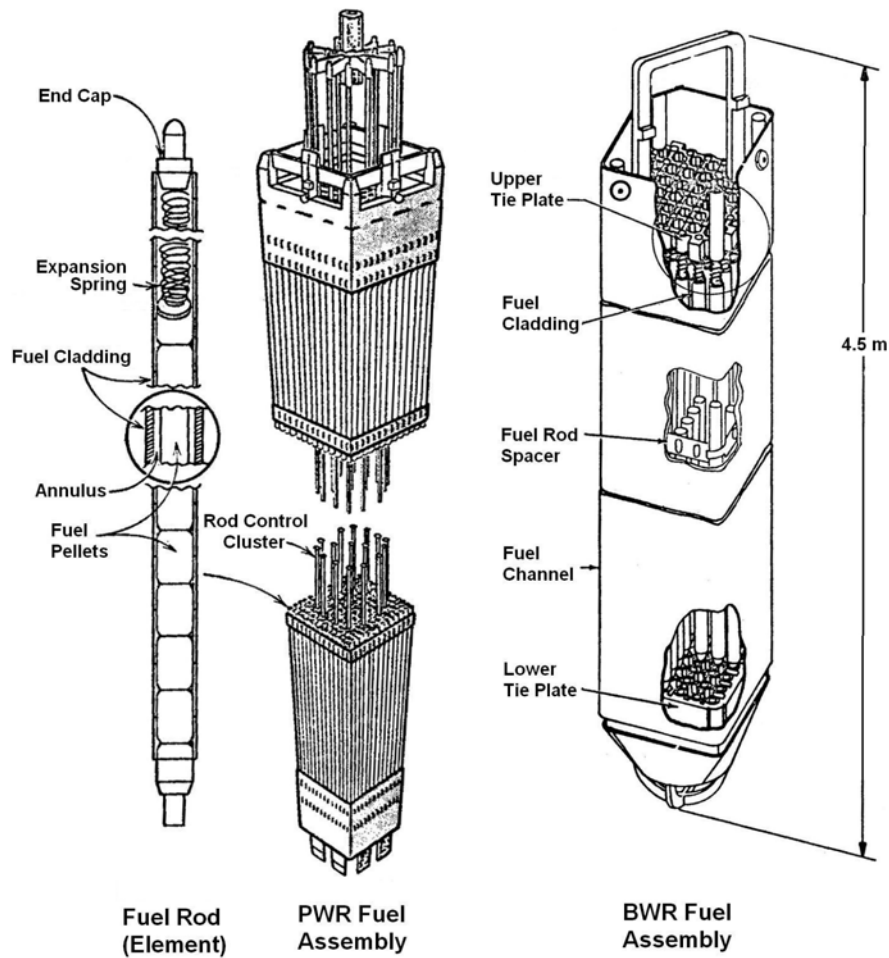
Fuel element and PWR fuel assembly (from Duderstadt and Hamilton 1976) and BWR fuel assembly (from USAEC 1973).
